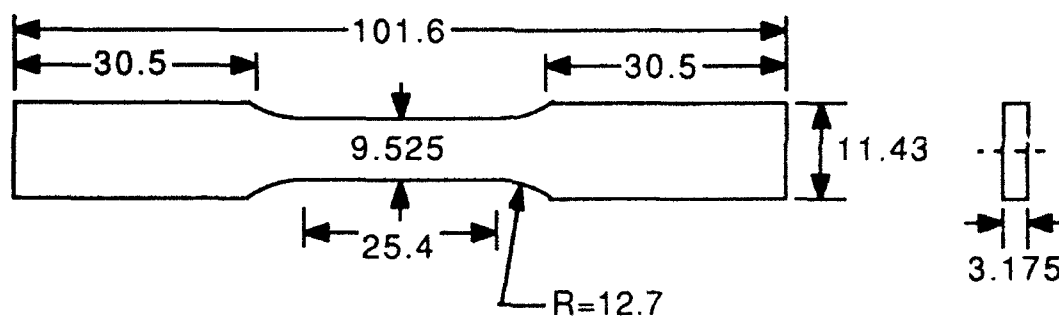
Flat tensile bar. All dimensions are listed in millimeters.
